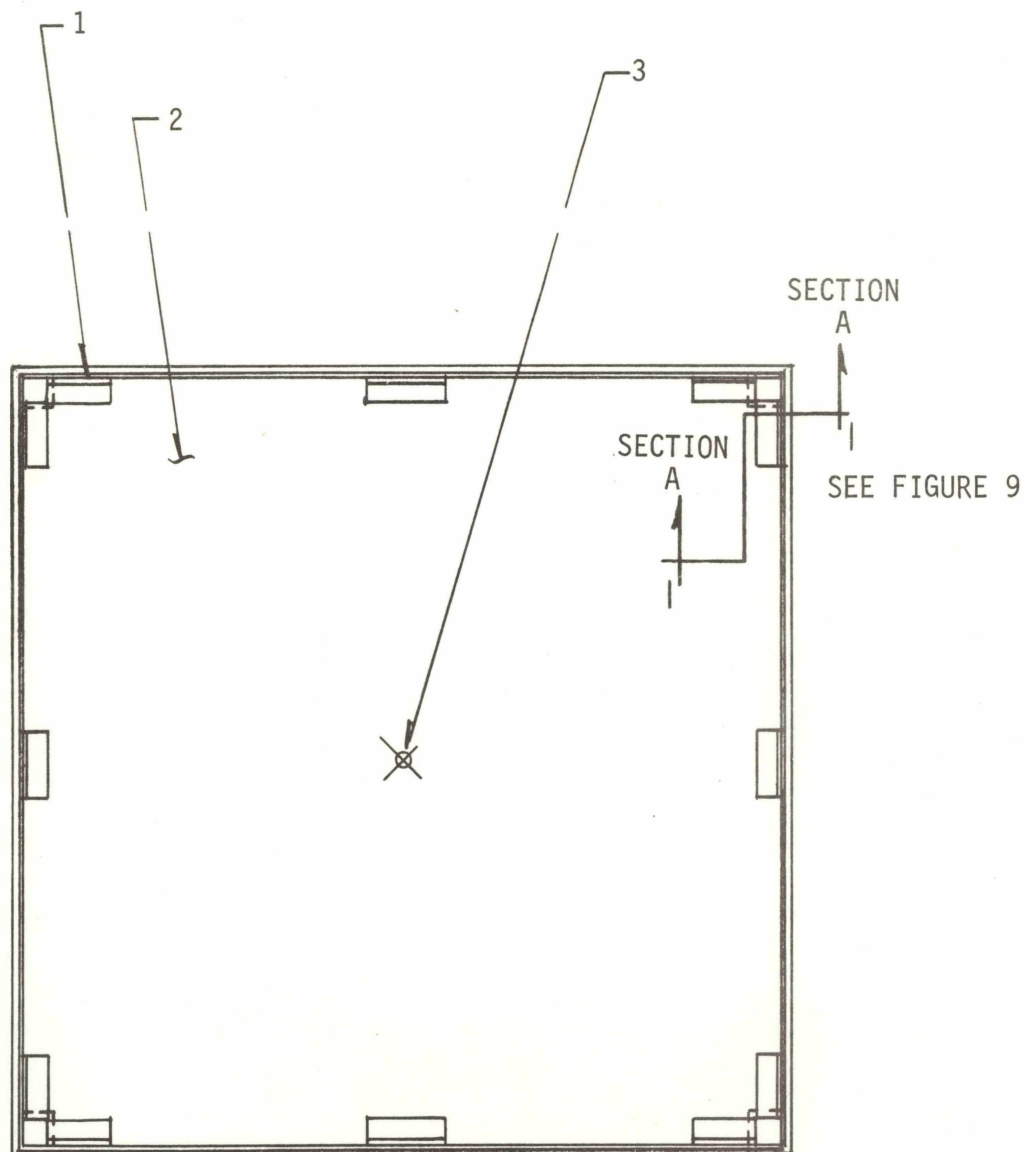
TEST SPECIMEN HOLDING FRAME
